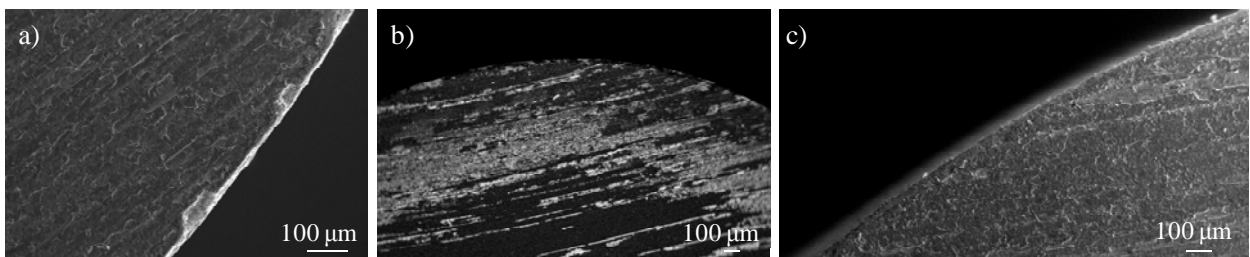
Fractography of the a) UNIVERSAL; b) and c) HWS punches coated with AlTiN; rake face after 5000 strokes
